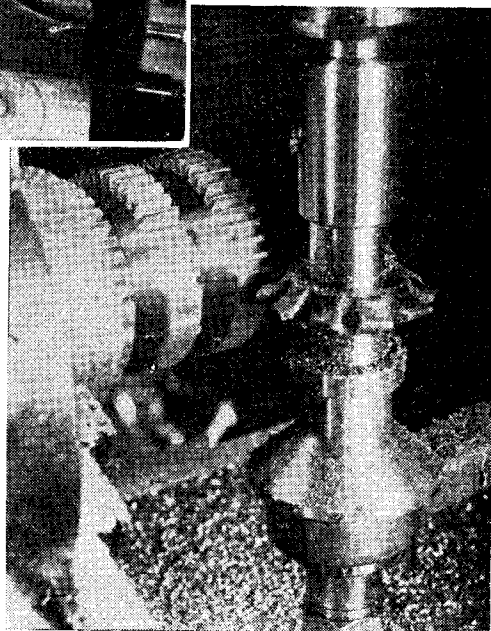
The outboard bearing and chip deflector fitted to the spindle
